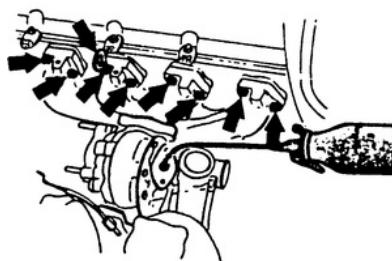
Lubricating the exhaust manifold bolts with a proper rust penetrant or lubricant aids their installation into the cylinder head. Note the manifold bolt locations
